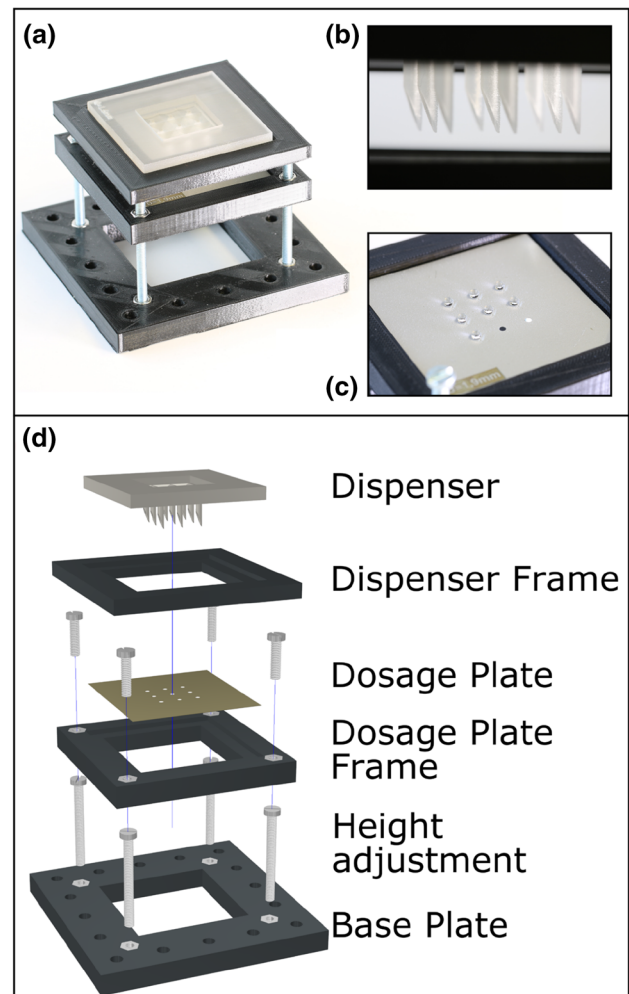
a–c Photograph of the setup. d Exploded view schematic of the setup
